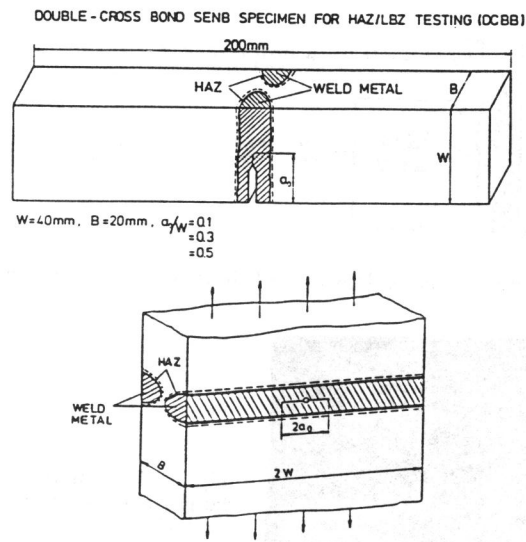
The double cross bond specimens for testing of HAZ/LBZs. a) SENB specimen, b) CCT specimen
